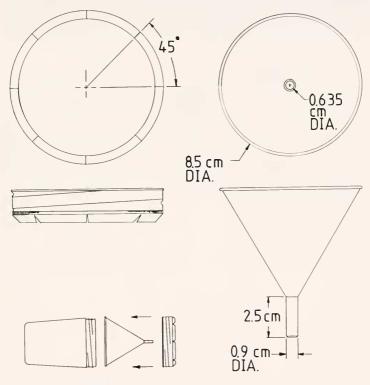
Components and assembly of collecting apparatus: modified Ball[®] jar band, modified funnel, and assembly.
